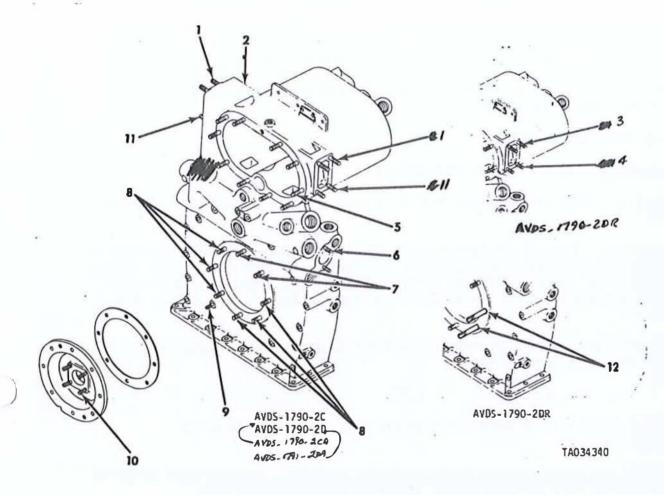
Crankshaft damper and oil filter housing standard stud identification.
